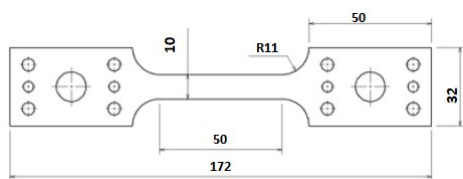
Dimensions of uniaxial tensile specimen (in mm).
